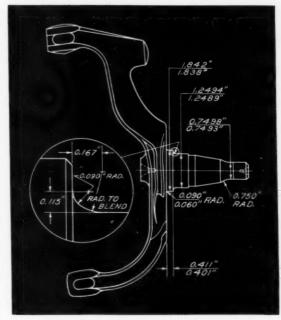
Surfaces finished on grinding machine shown in Fig. 2. Enlarged view in circle indicates compound radius required between bearing and oil-seal surfaces.
